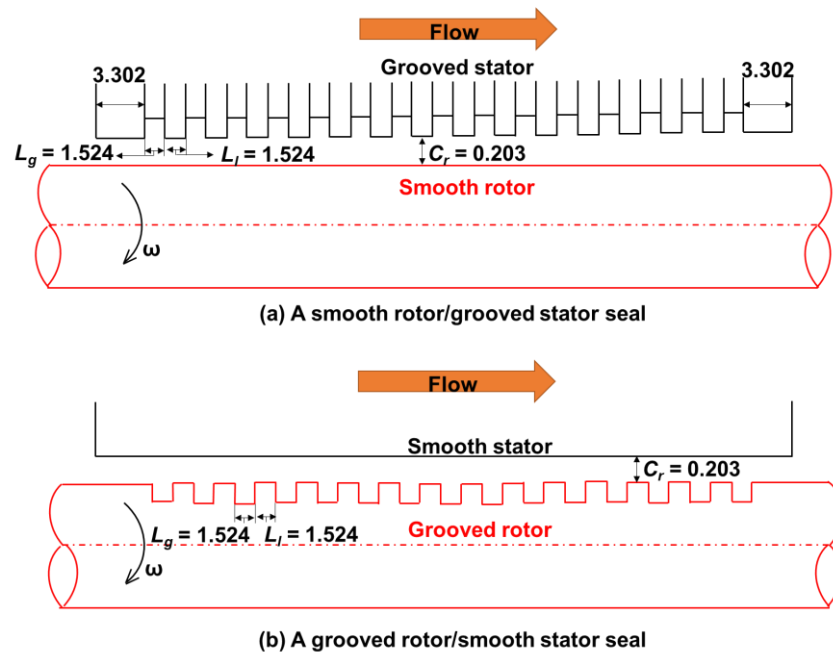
Two grooved seals geometry and grooves details. All dimensions are in mm; rotor diameter $D = 101.6$ mm. Design clearances are shown.
